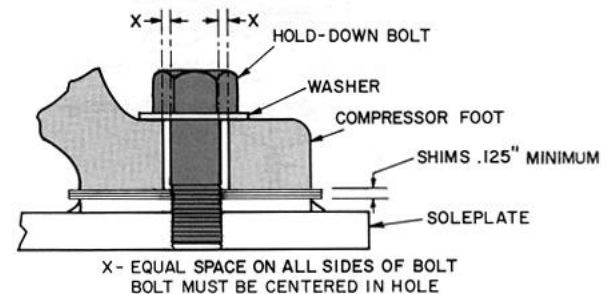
Machine Footing Hold-Down Bolt Arrangement
